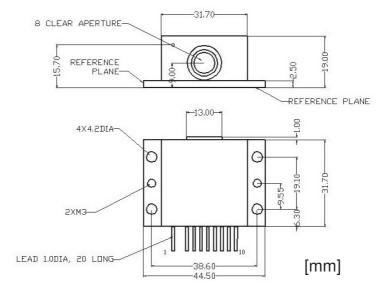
Support mounting for HHL-33 (specifications of the HHL-L module)
